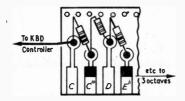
(a). Wiring of the edge connector strip as used on the prototype. Resistors are wired in from the conductor side of the board. Excess wire on the other side of the p.c.b. should be trimmed off and filed flush so that the board may be glued to the front panel
